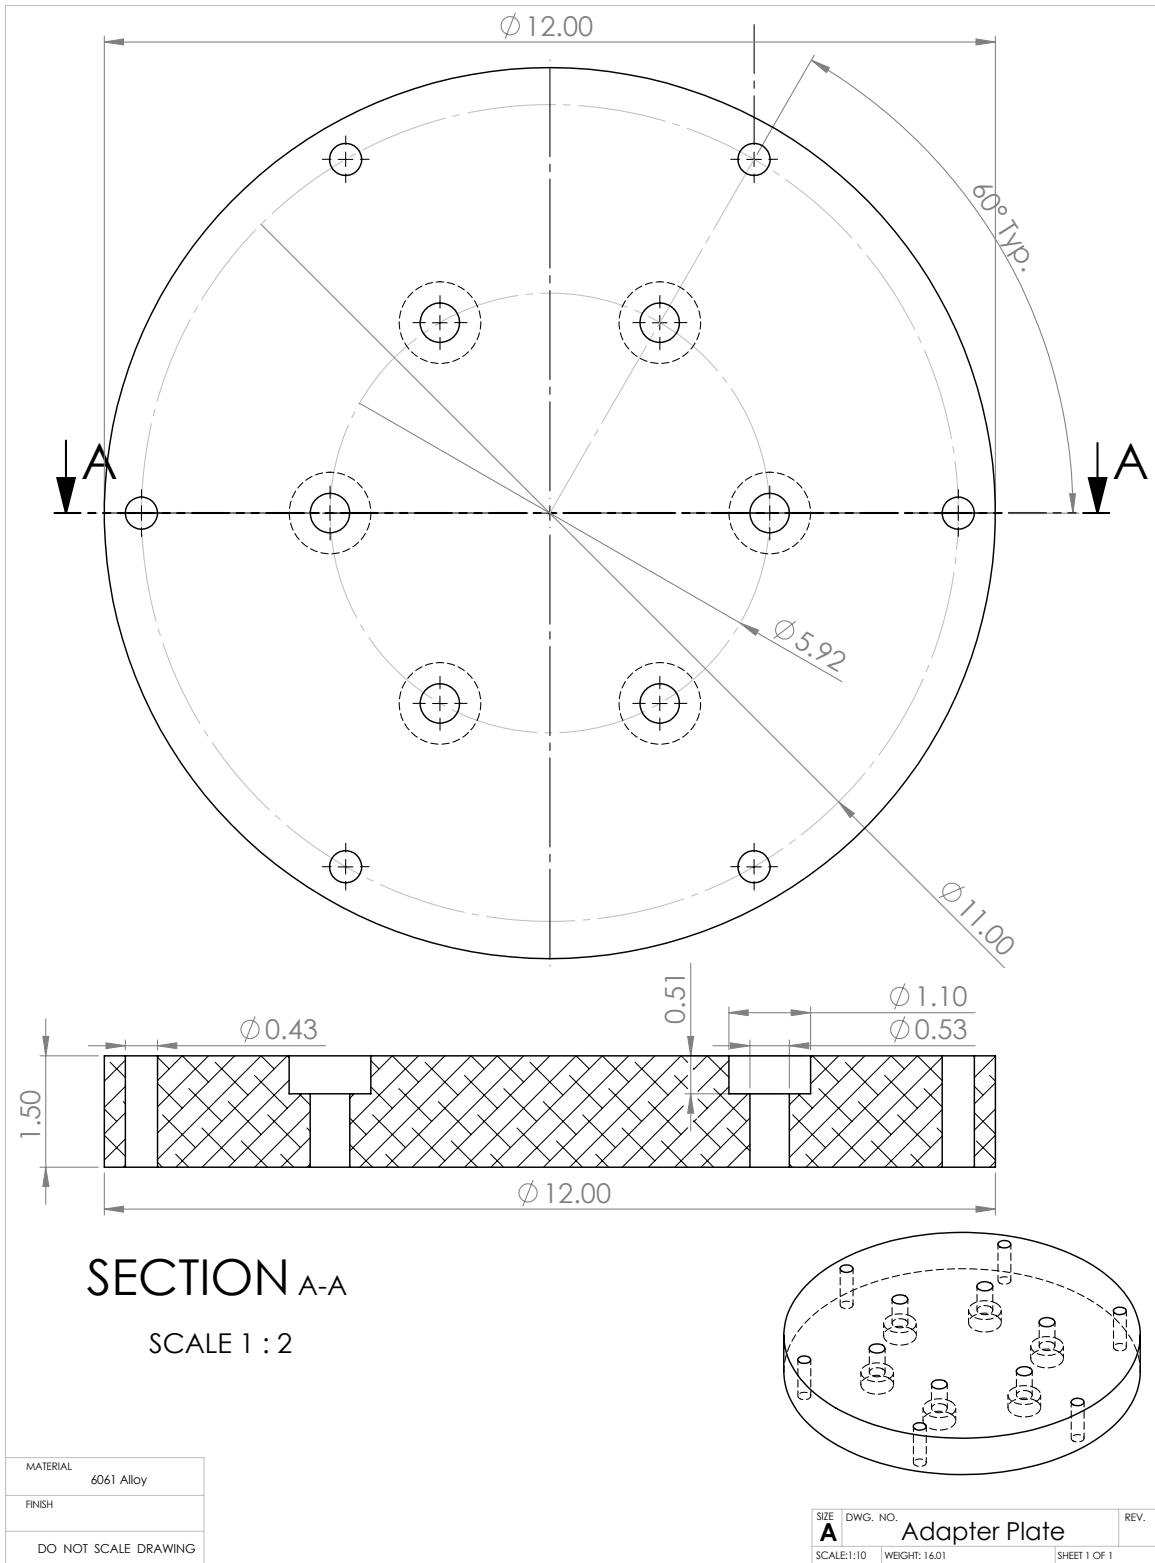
Adapter plate between load cell and foil tang clamp. Dimensions are in inches.
